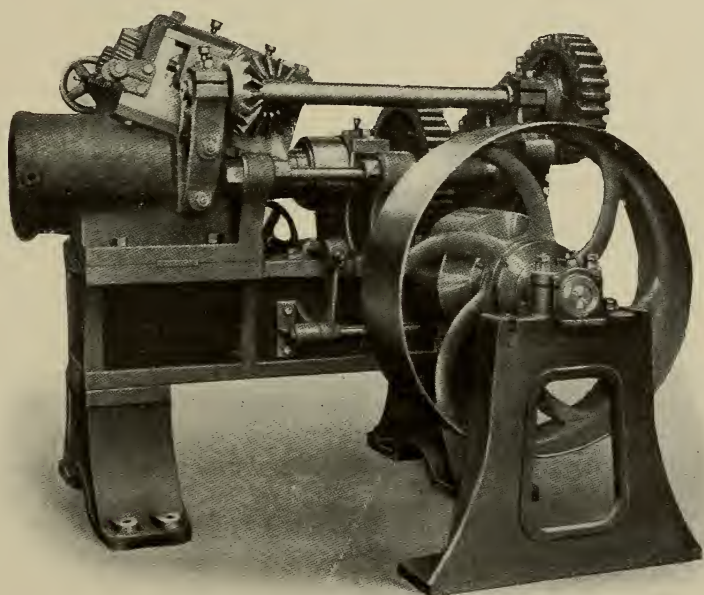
TUBING MACHINE WITH THE KAY FEED.
